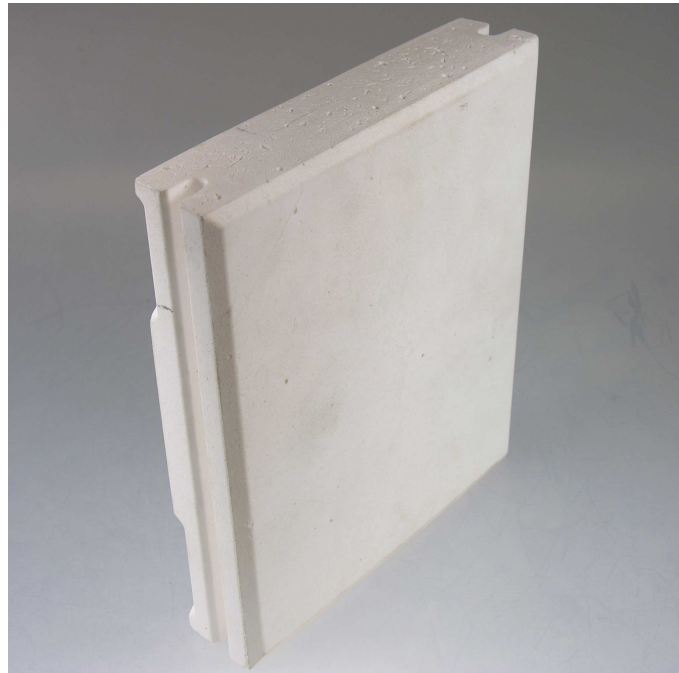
Photograph of the tomographed ceramic specimen that is used in power generation technology. Samples such as the one shown here are to be inspected for inner cracks, voids, and dimensional tolerances with CT. The specimen's dimensions are $192 \times 190 \times 38 \text{ mm}^3$.
